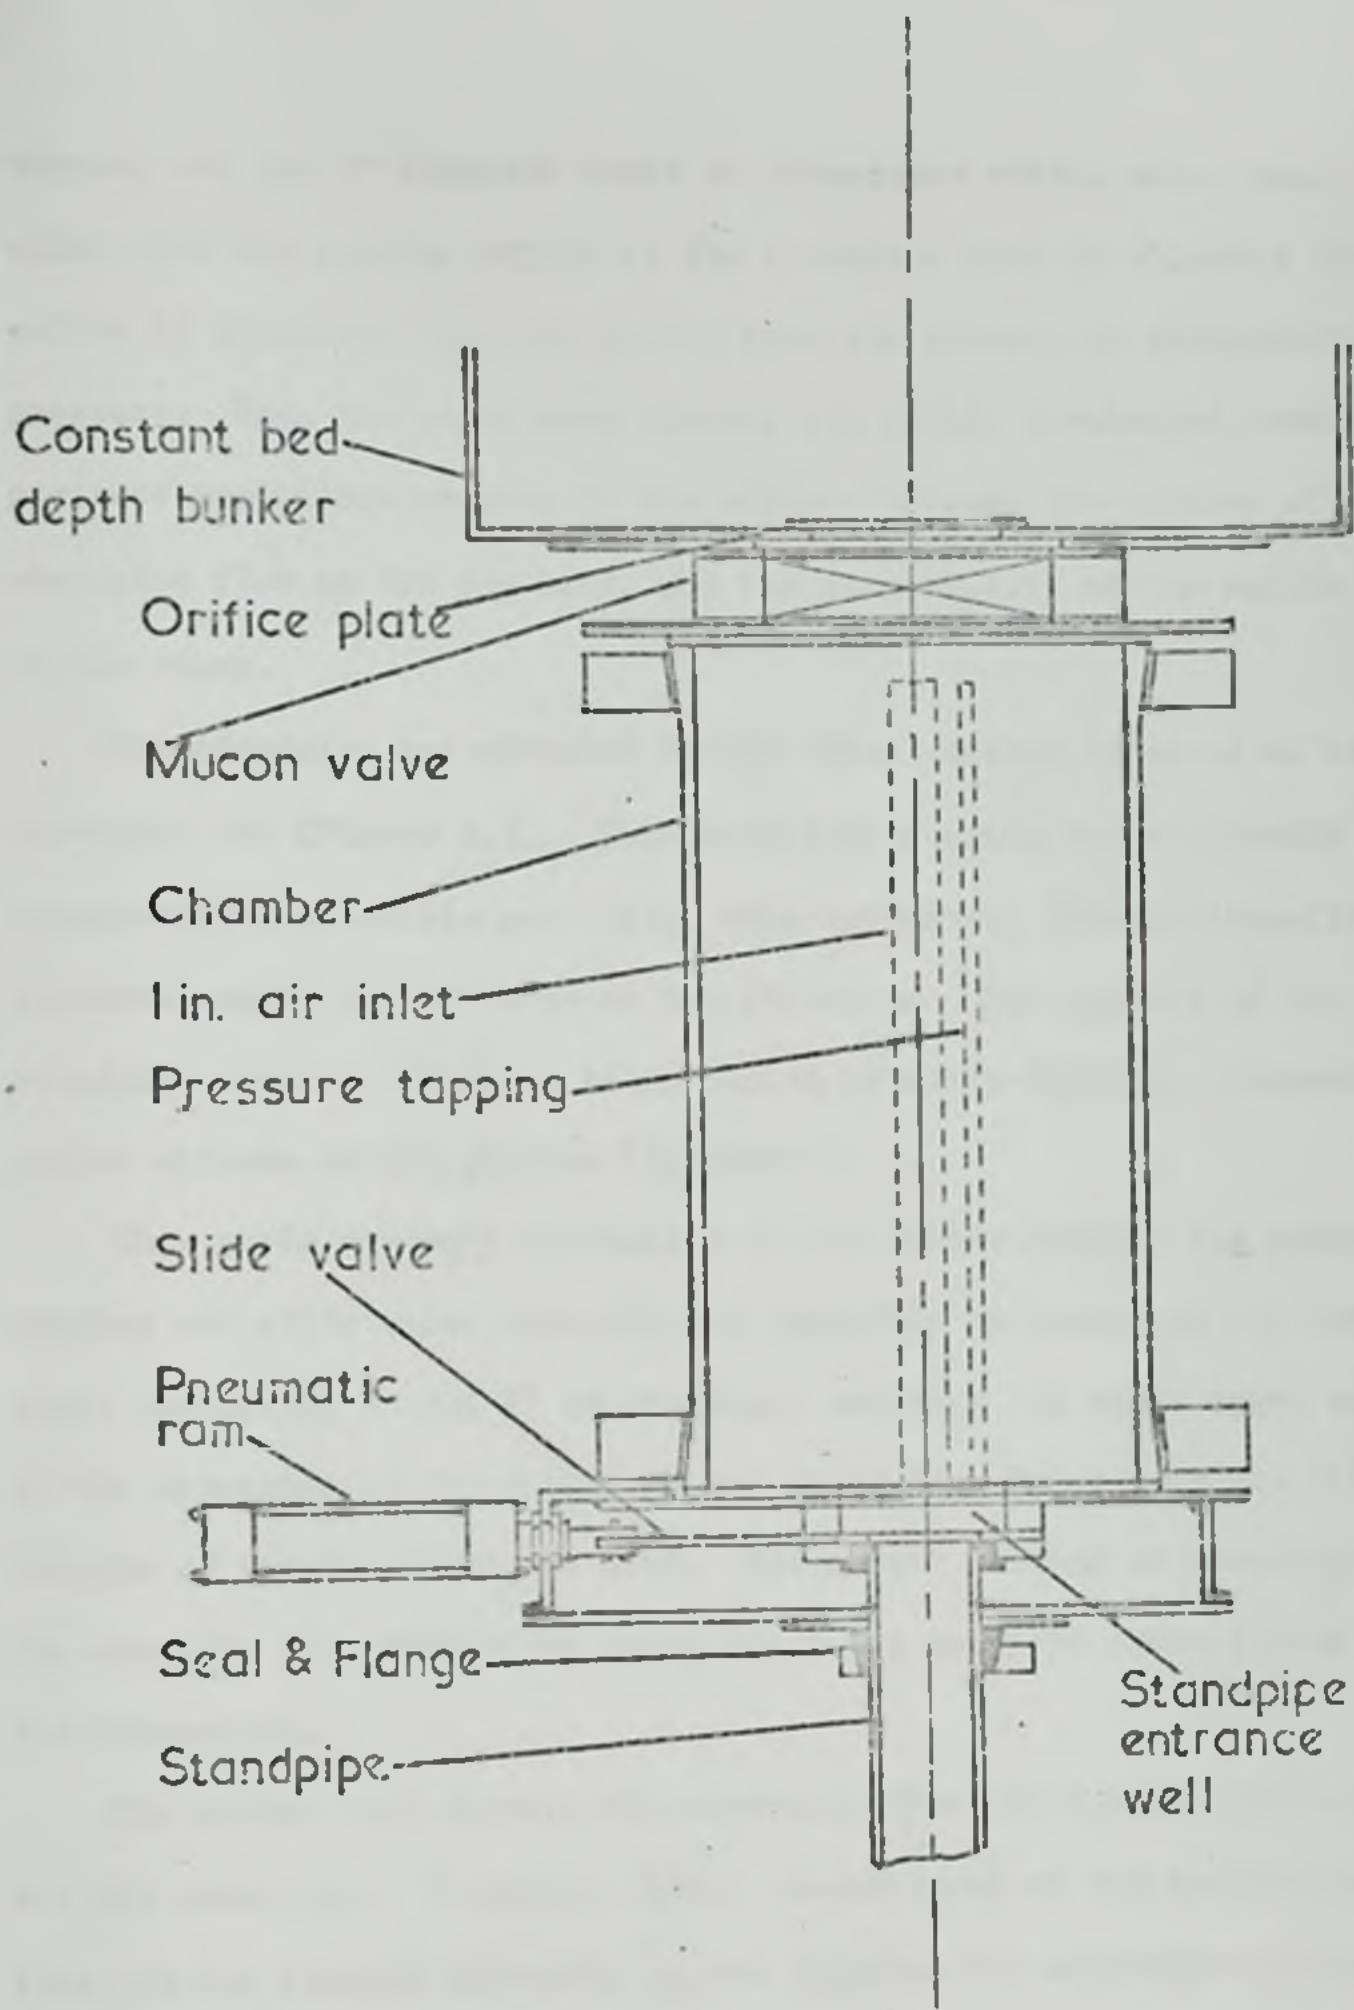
Detail of chamber and slide valve assembly Scale 1cm:2ins
